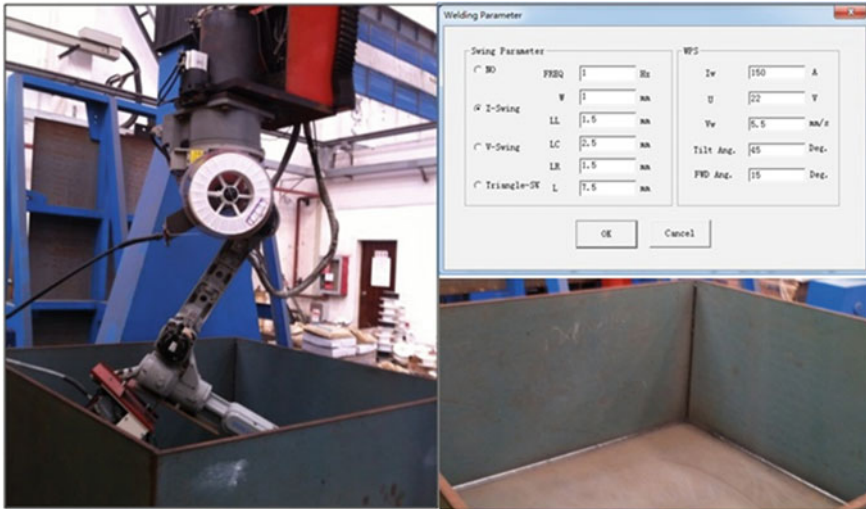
Arc welding robotic system for inner bottom hull and appearance of fillet weld
